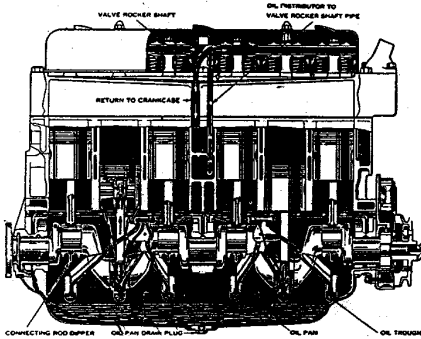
The splash and pressure type oiling system also uses dippers and an oil pump, but the oil is pumped to the bearings under pressure.
